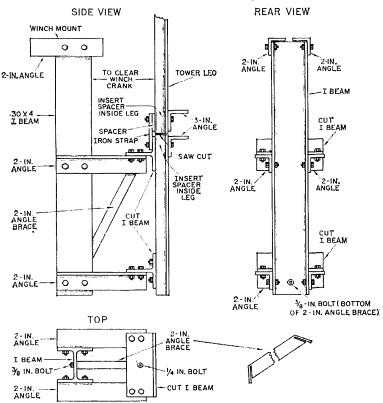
Sketch showing how the I-beam winch support is fastened to the tower.
